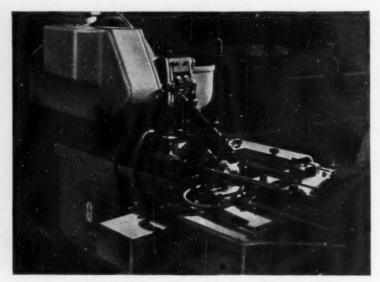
Type PABF10 Hopper-fed Bolt Head Trimming Machine
